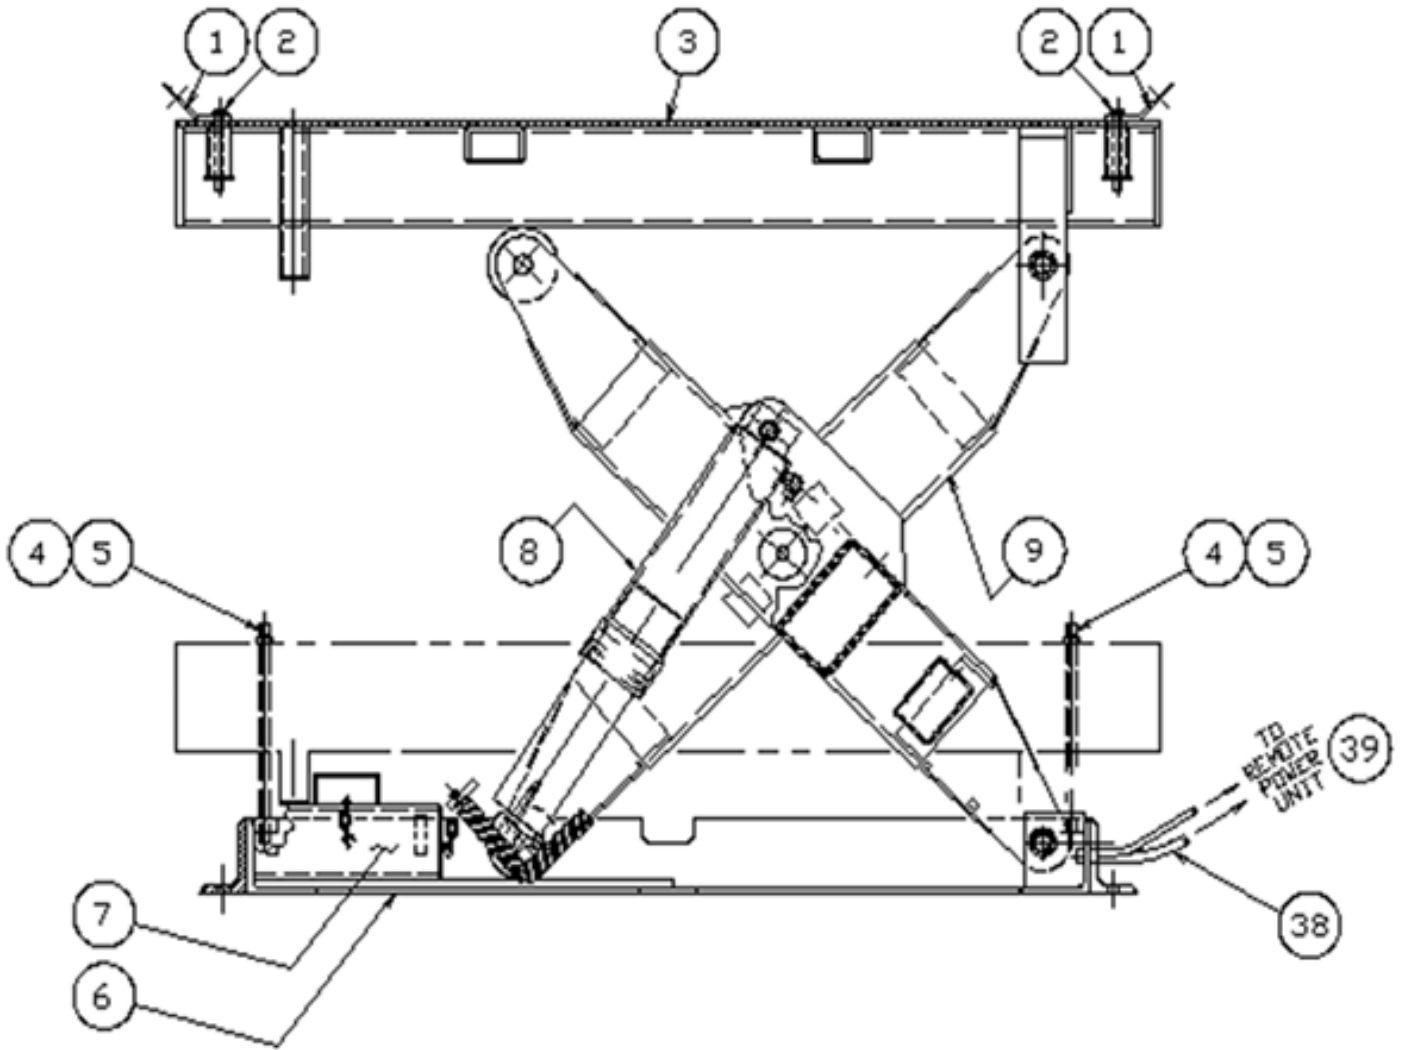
TYPICAL MLT DETAIL PARTS (END VIEW)
